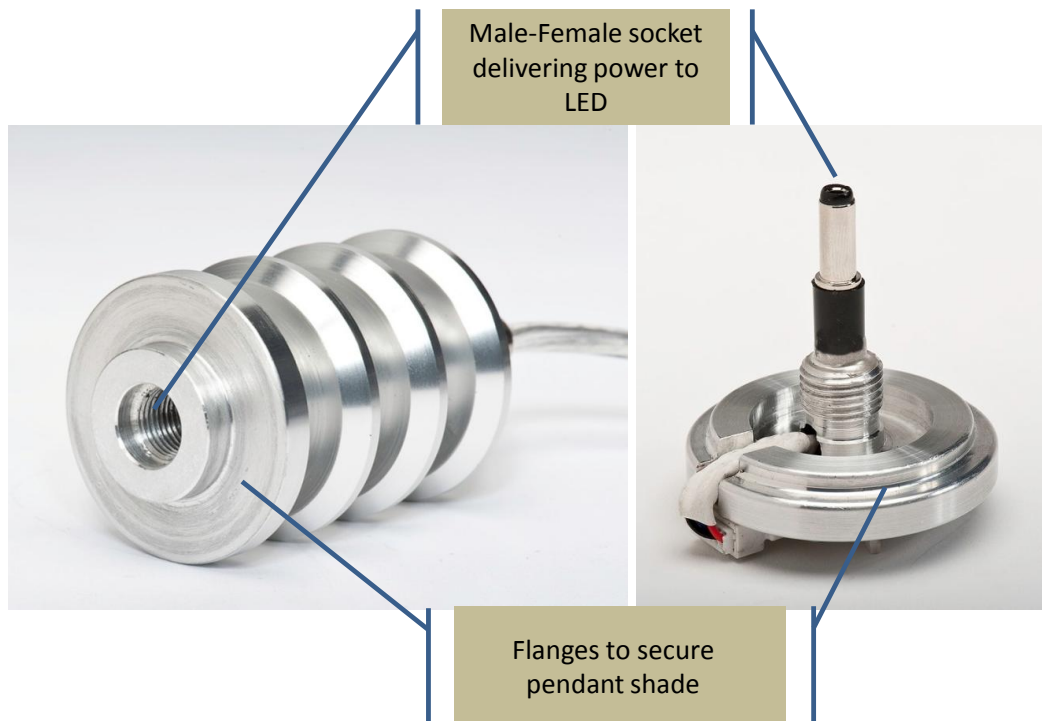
Revised Two-piece, Threaded Pendant Heat Sink Assembly
